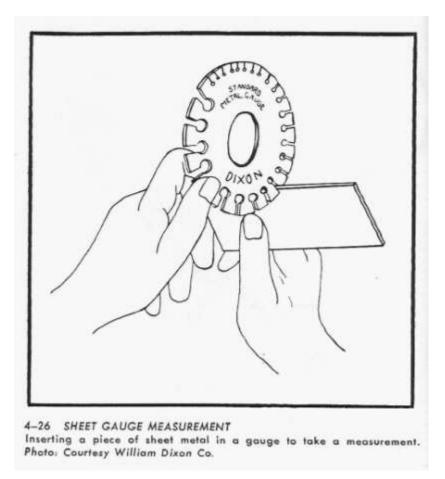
(Untracht 1982; 72) Gauge for measuring sheets
